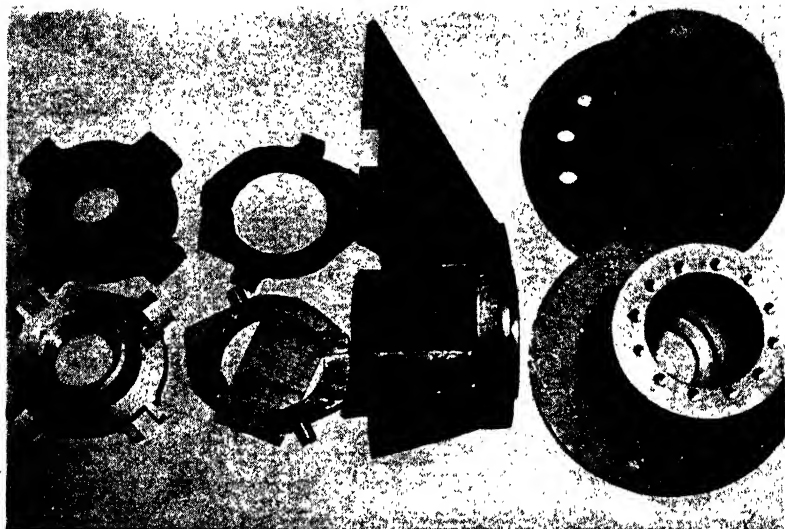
Variations in the amount of metal removed in different portions of the same cut are almost certain to be encountered in machining these flame-cut parts and welded structures. These differences in the same cut constitute a machining problem. (Courtesy of R. G. LeTourneau, Inc.)
